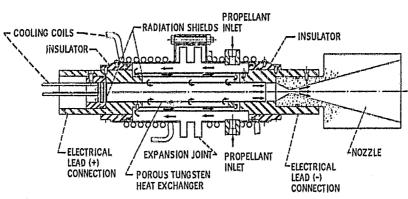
Jack and Spisz resistance-heated hydrogen engine.
